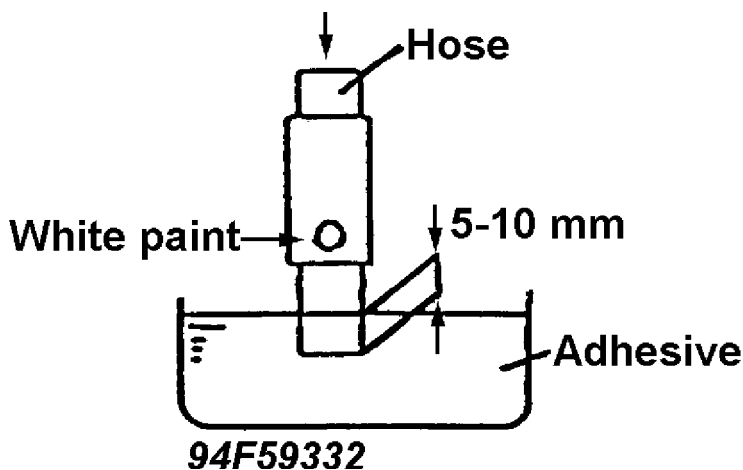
Installing Hose on Inlet Side of Primary Fuel Distributor
